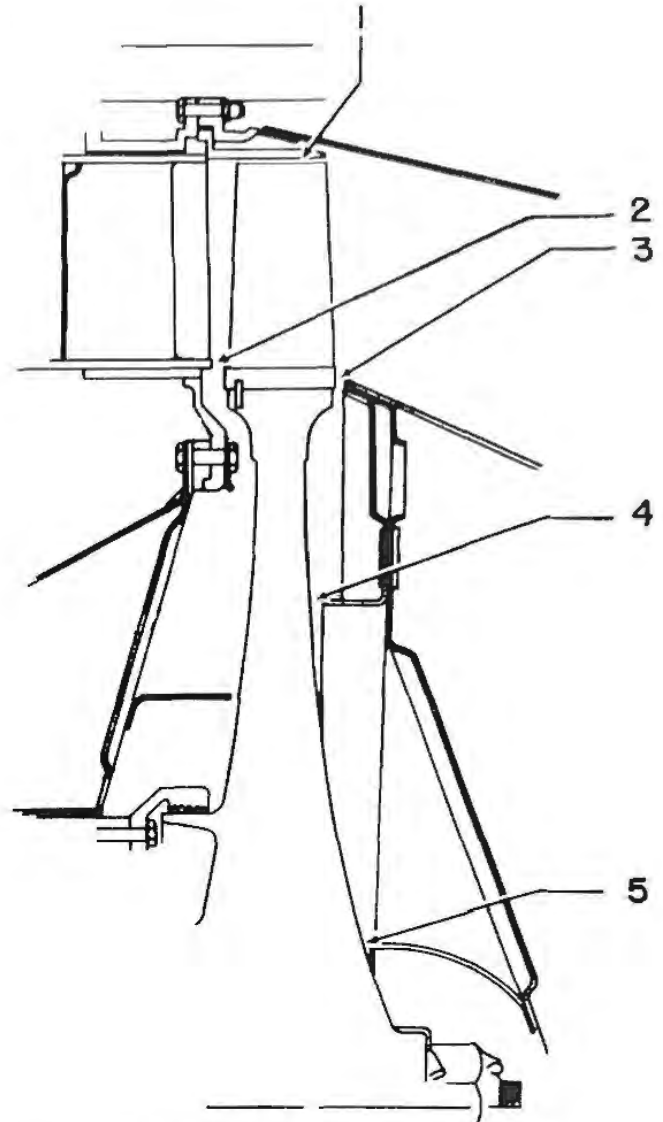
Turbine Rotor and Exhaust Cone Clearances
